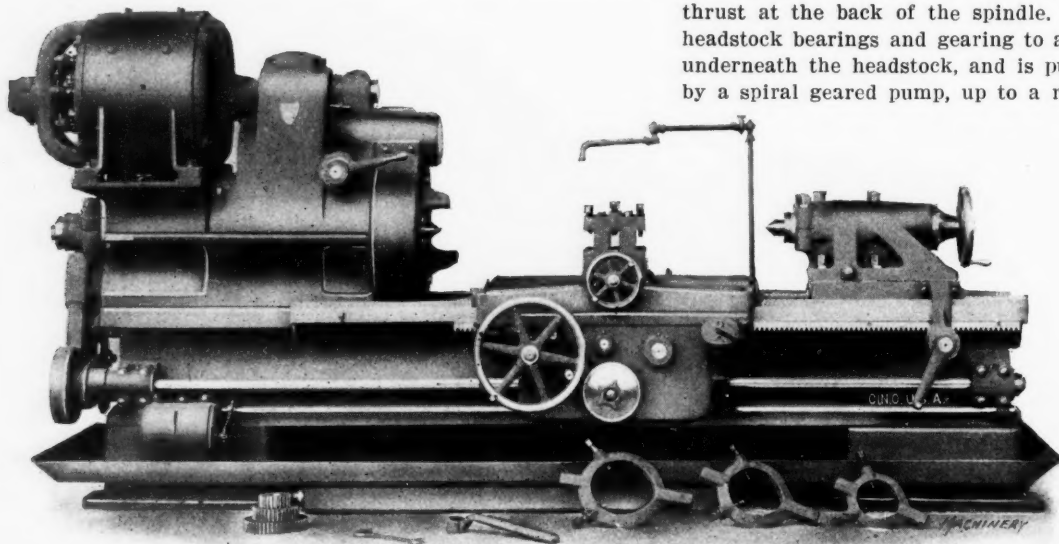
Powerful Motor driven Lathe built by Lodge & Shipley
